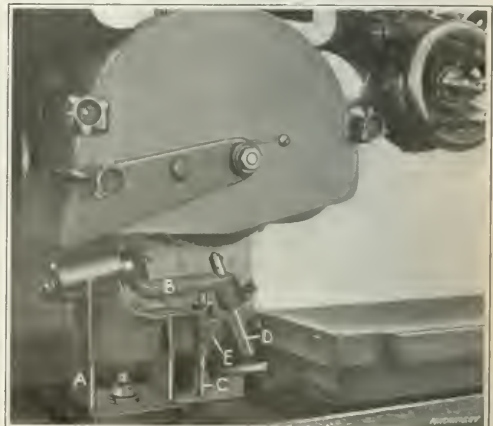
Radius Wheel Truing Device for Use on Norton Surface Grinding Machines
